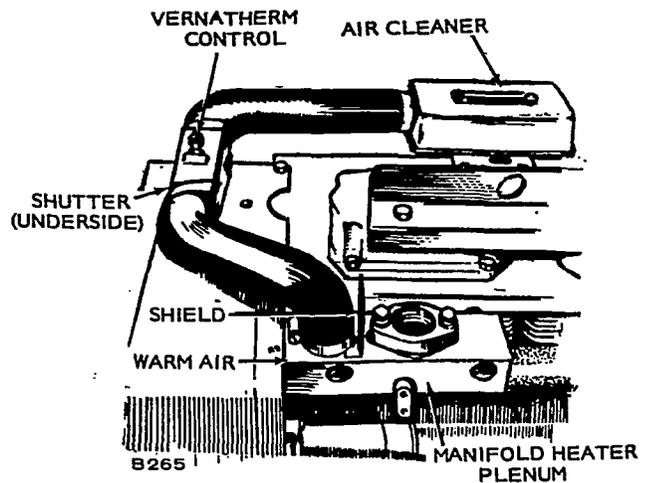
OPTIONAL CARBURETOR AIR PRE-HEATER
